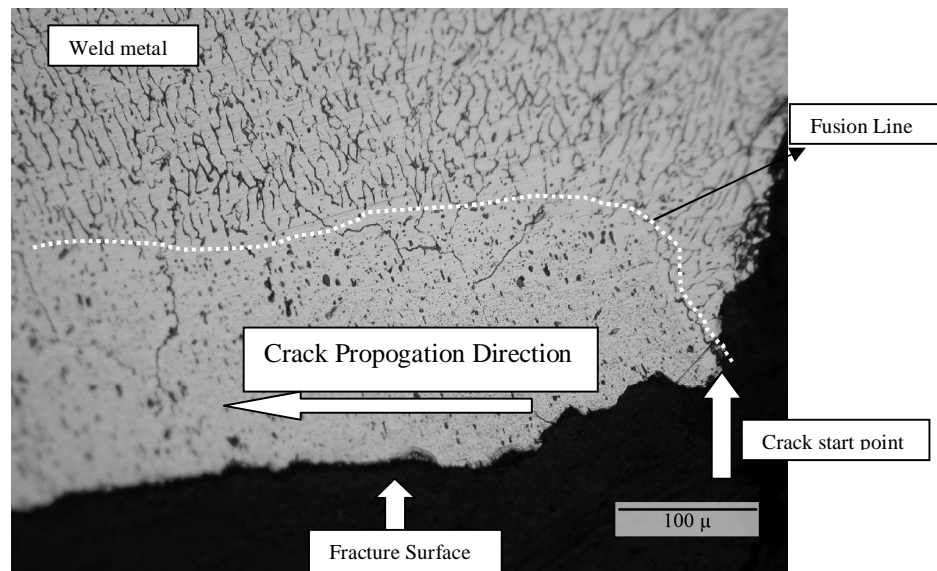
Crack propagation Direction, Dynamic Loading Test Specimen Welded with parameter group 1, Etchant: Keller
